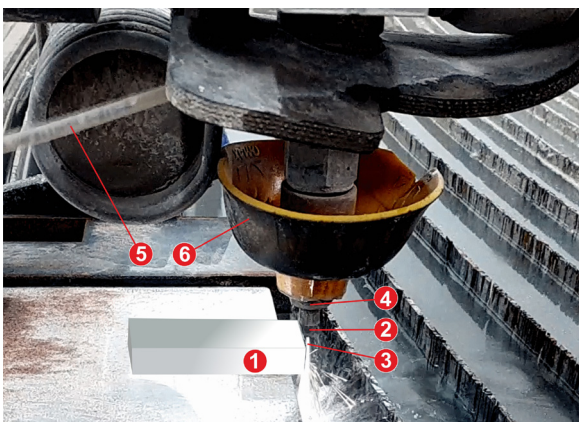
AWJ cutting process: 1) target material, 2) focusing tube, 3) AWJ, 4) cutting head, 5) abrasive inlet, and 6) cutting head cover
